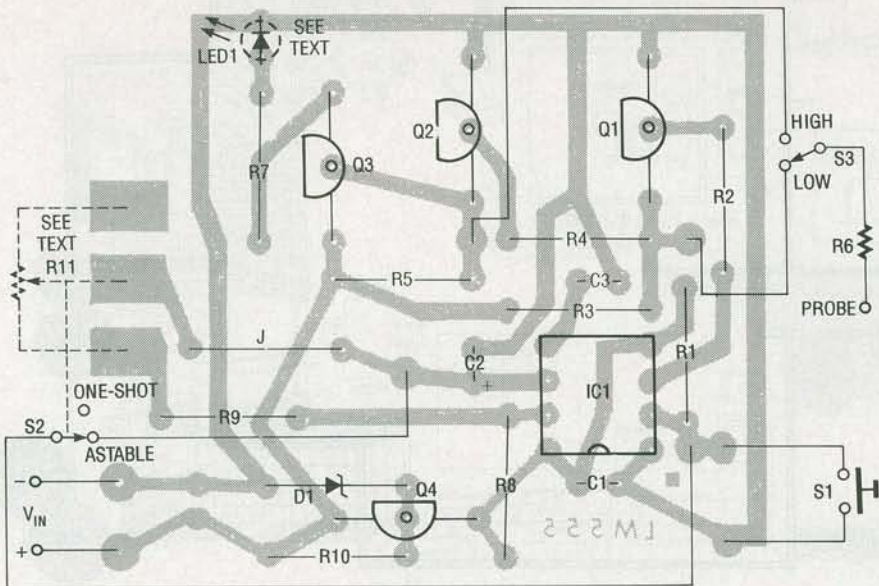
PARTS-PLACEMENT DIAGRAM. Note that LED1 and R11-S2 mount on the foil side of the board.
